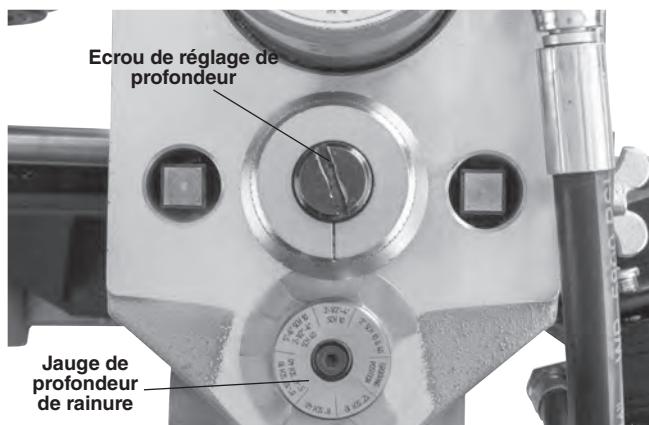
A – Place Correct Step of Gauge Under Adjusting Head
